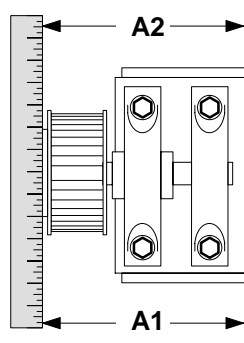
Idler Pulley Replacement - Adjusting Position on Shaft (Bottom View)
